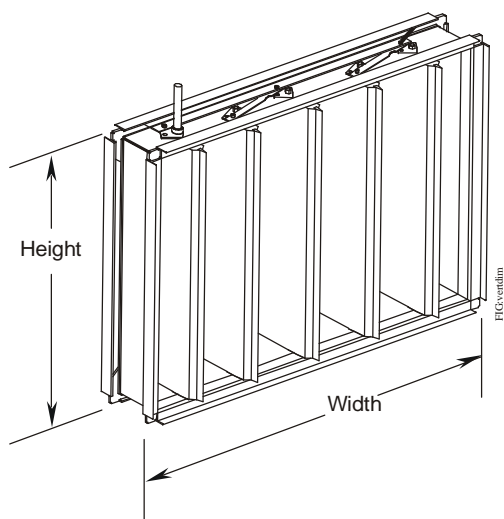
Mounting Dimensions Vertical Blades with Thrust Washers (VD-1250 Model)
